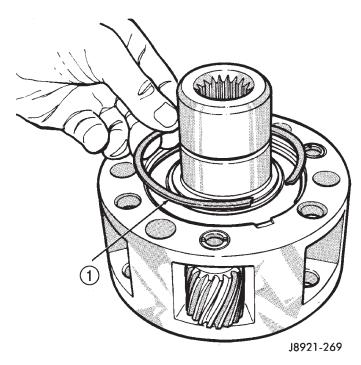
Low Range Gear Snap-Ring Removal/ Installation
